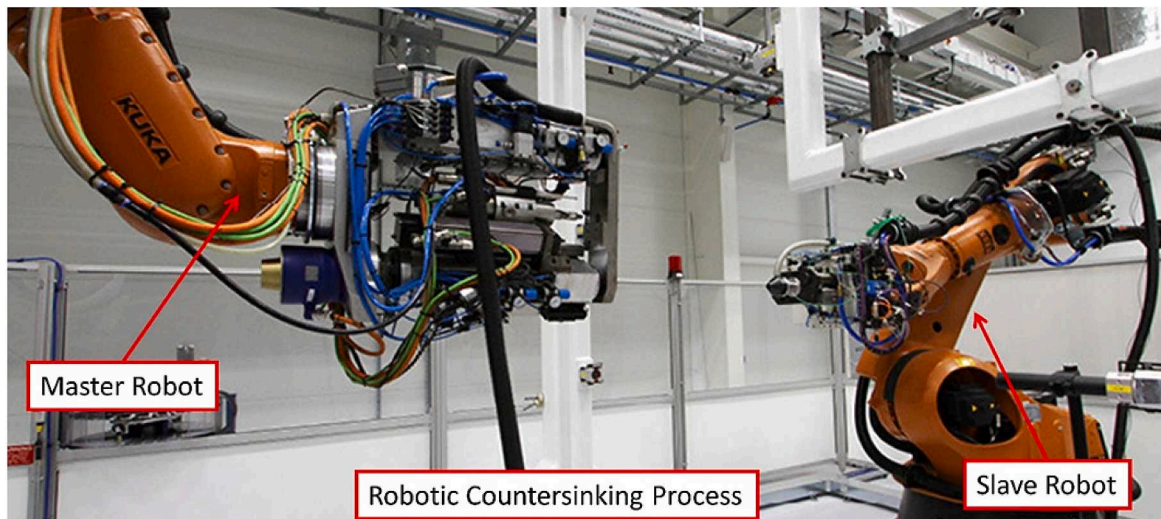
Robotic platform used for the countersinking process: Master robot (left) and Slave robot (right).
